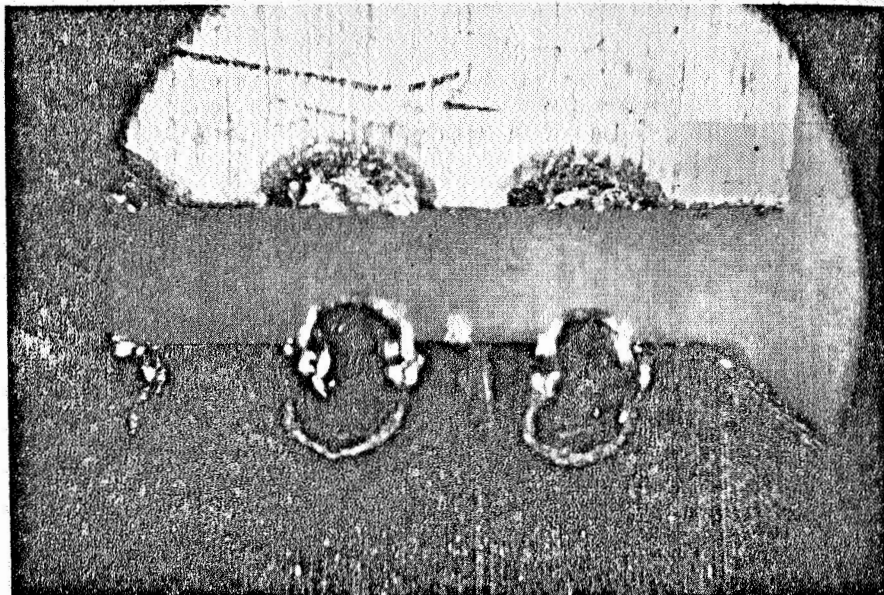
Pull Test on Group A Weld at .003 Offset
